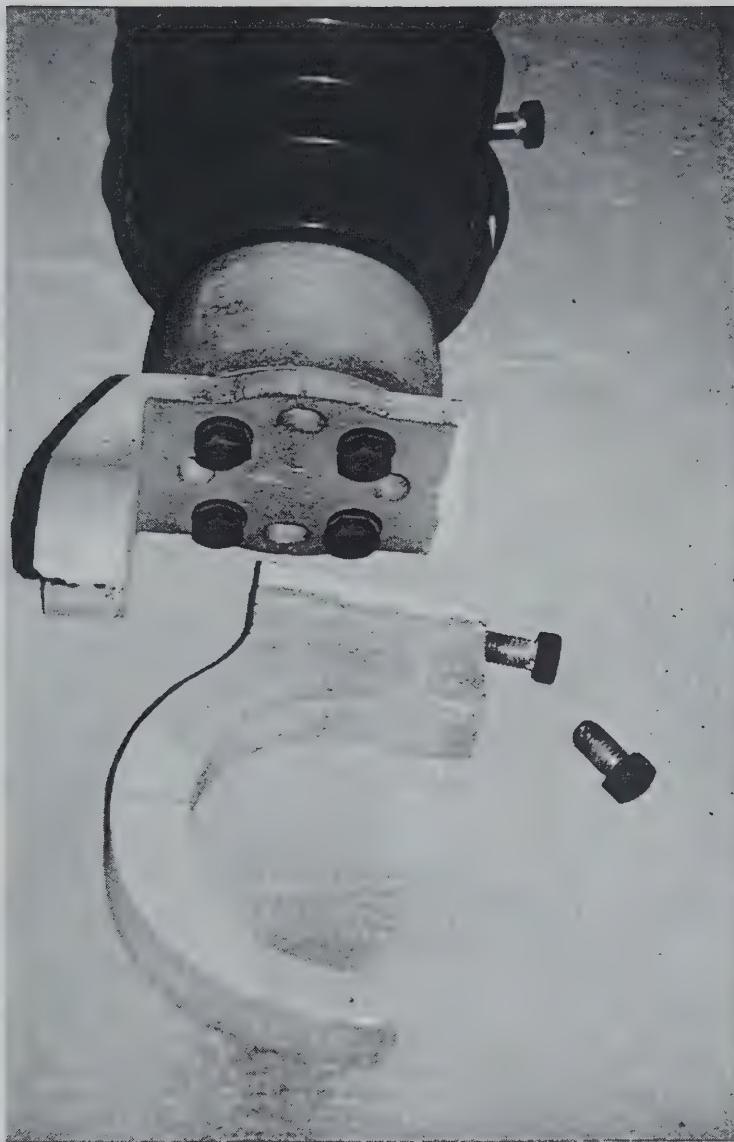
Cast aluminum hooks used to hold a 34.5 kV rigid bus failed.
